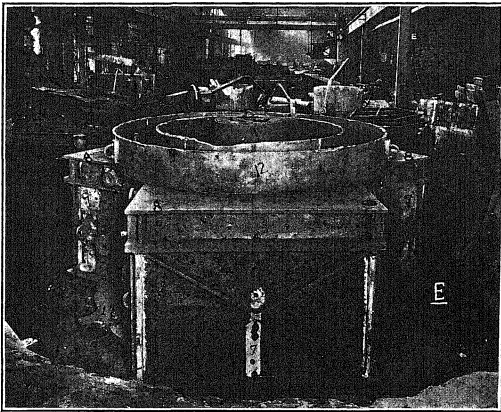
MOLD WITH POURING RING IN CENTER.
